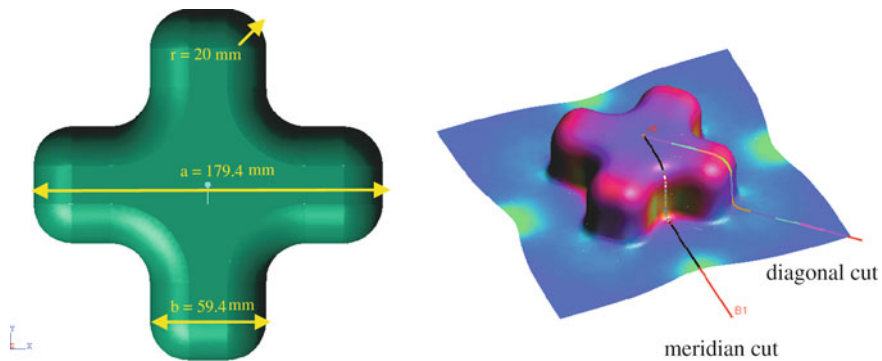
Left: Punch geometry from above. Right: Sheet at punch stroke 60 mm, with sections for draw in measurements and thickness measurements
